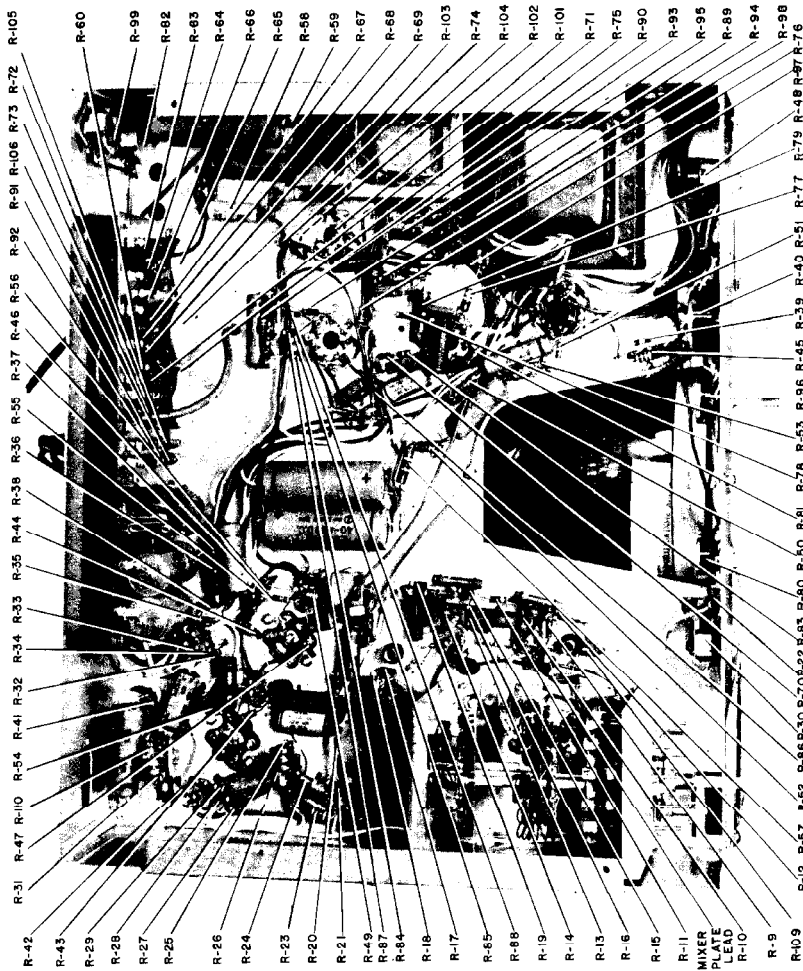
Resistor Locations — Bottom of receiver (cabinet removed)
